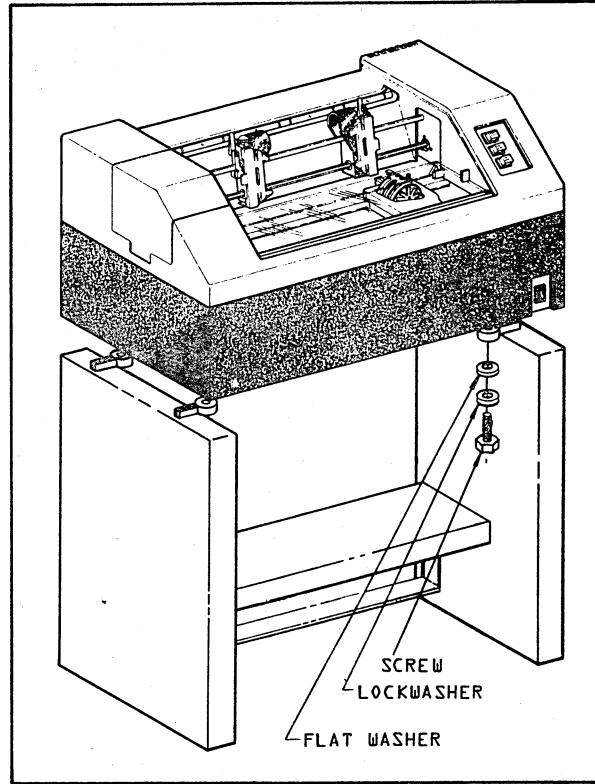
PRINTER TO PEDESTAL MOUNTING
